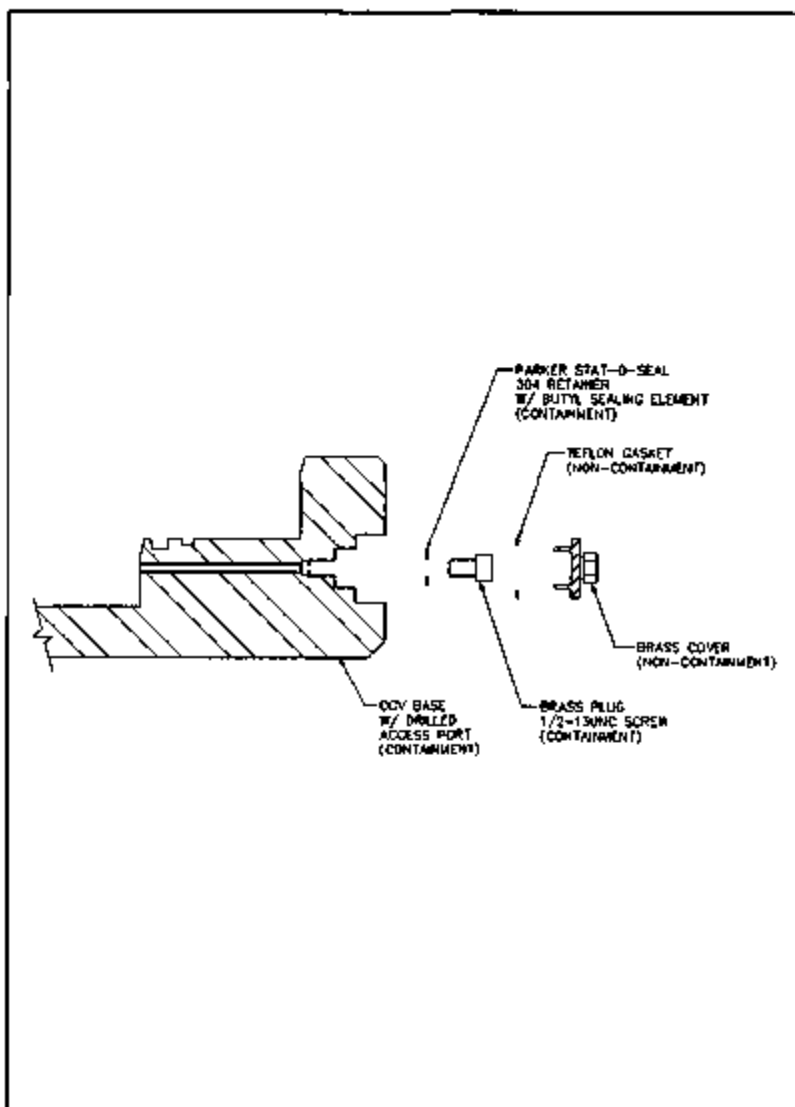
Exploded View of OCV Vent Port and Cover Design.
